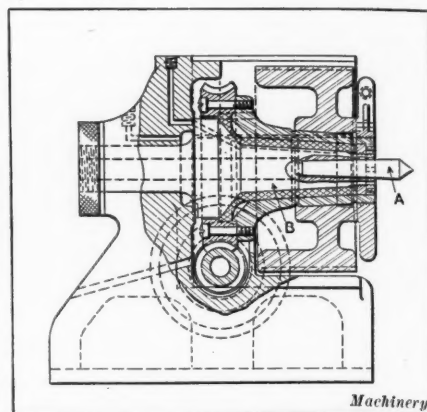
Provision for supporting Thread Gage on Dead Head Center while grinding
